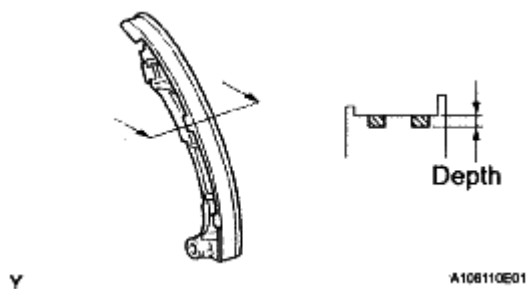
Identifying Worn Depth Of Chain Tensioner Slipper
